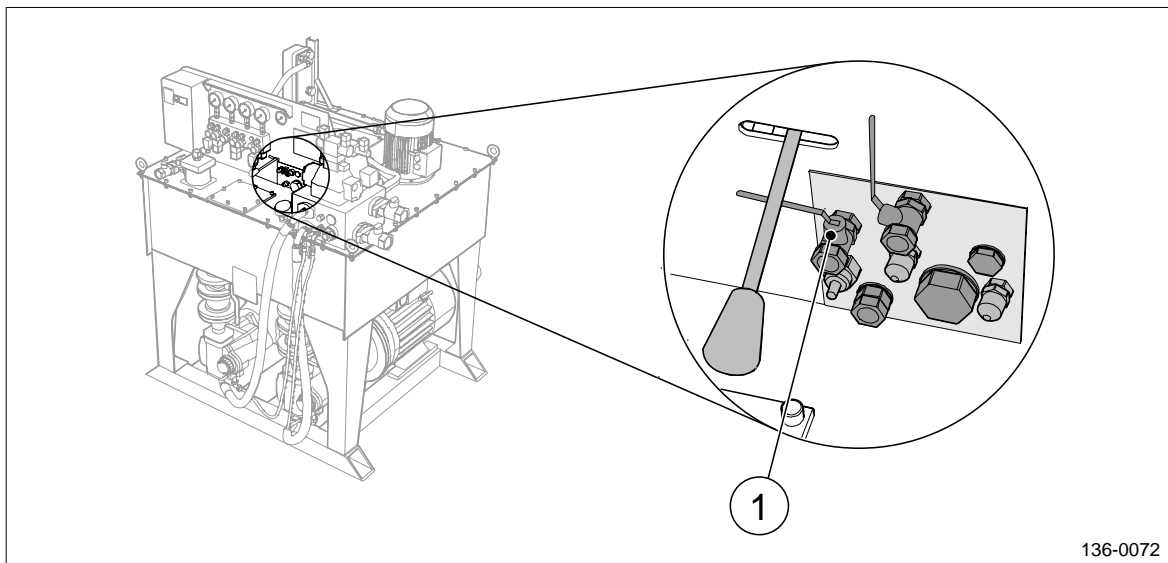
The emergency operating control panel on the hydraulic power pack unit.
